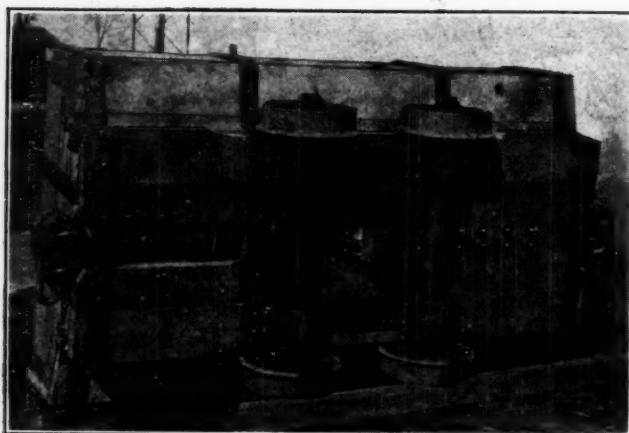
MINE CAR HAS SPRING DRAFT RIGGING
